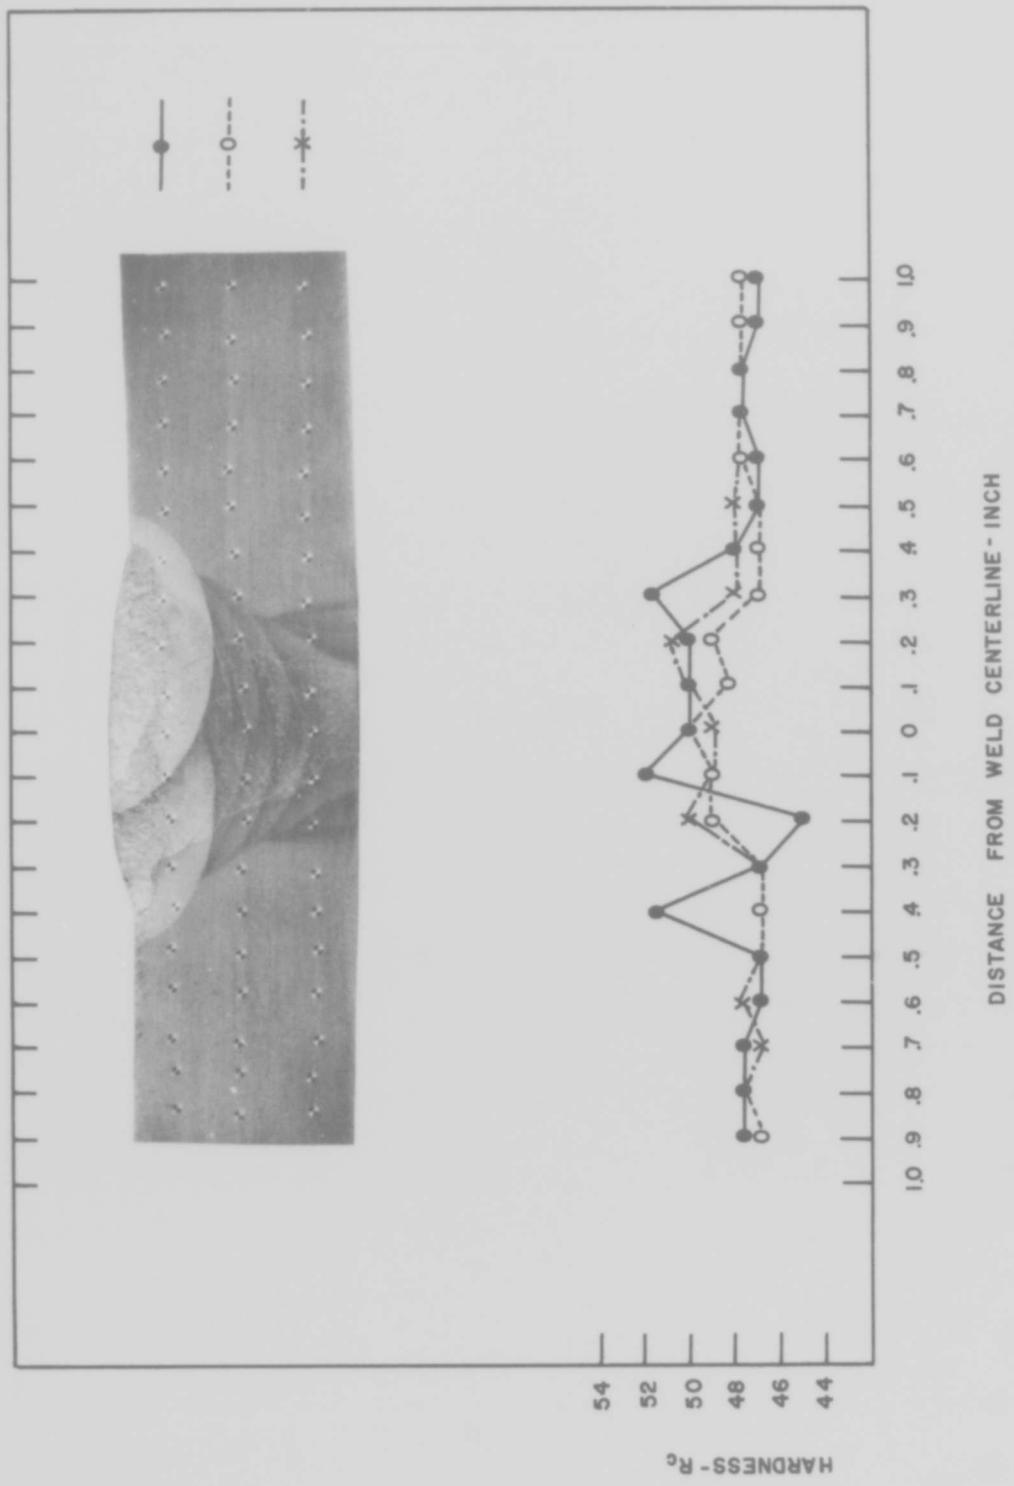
Hardness Survey of TIG Weld No. H250 Made in HP 9-11-20 Plate Using Filler Wire No. 111 (HP 9-11-20 Modified with 0.06%Al).
